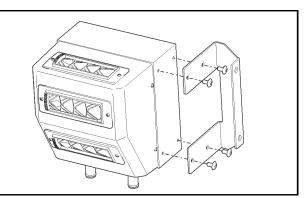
(Pre-Assemble Heater to Bracket)
